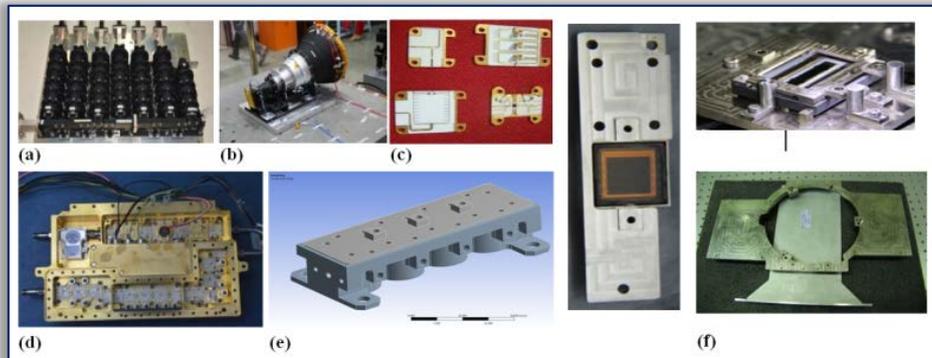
a) Mux filter b) Feed horn c) Carrier plate d) Electromechanical Package e) RF Package f) Invar Structures for Optics [33]
